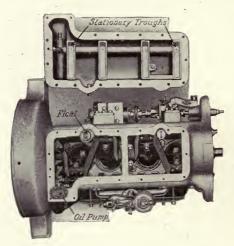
Base Removed on Constant-Level Splash Lubricated Motor.
